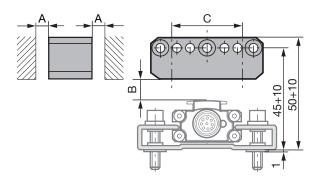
Dimensions and distances with BTL5-P-5500-2 magnet
